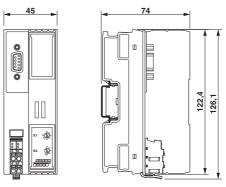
Nominal dimensions of a controller/bus coupler housing with separate bus base (type BK, e.g., AXL F BK PB, AXC 1050)
